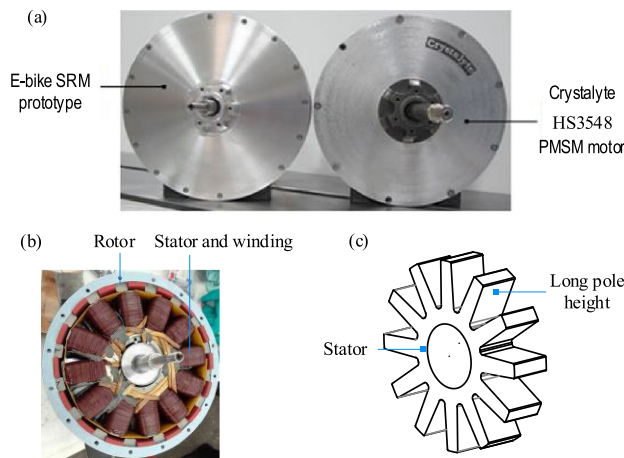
12/16 external-rotor SRM prototype: (a) SRM prototype and the commercial Crystalyte HS3548 PMSM motor, (b) interior of the SRM prototype, (c) CAD drawing of the stator [14].
